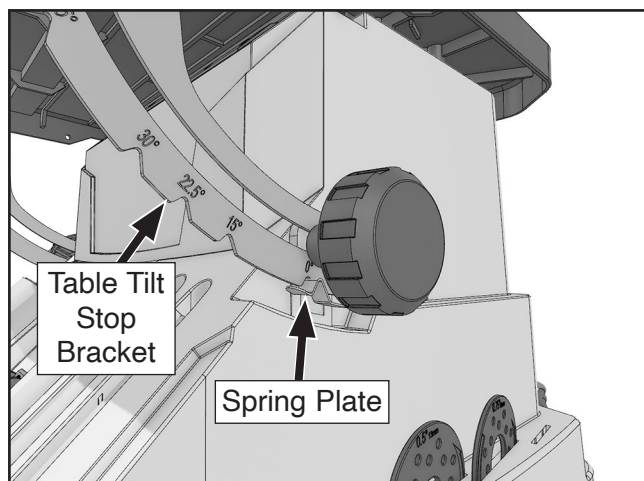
Spring plate engaging table tilt stop bracket at 0°.
